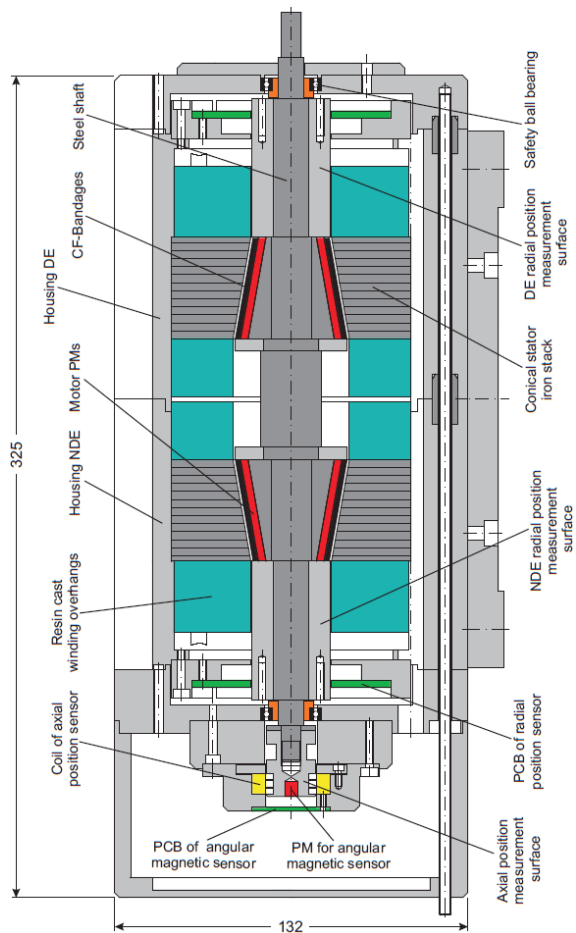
2D assembly drawing of Conical-BM (axial cross-section) [14].
